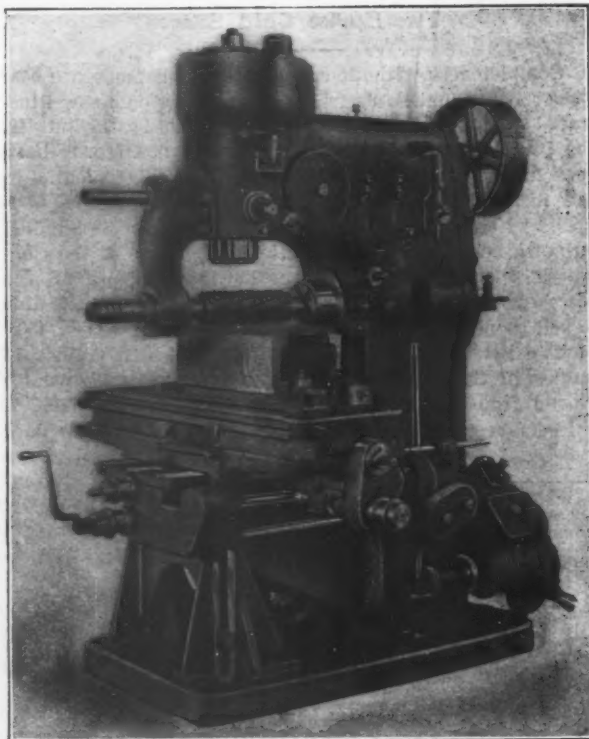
The Machine as Set Up for Horizontal Milling.
